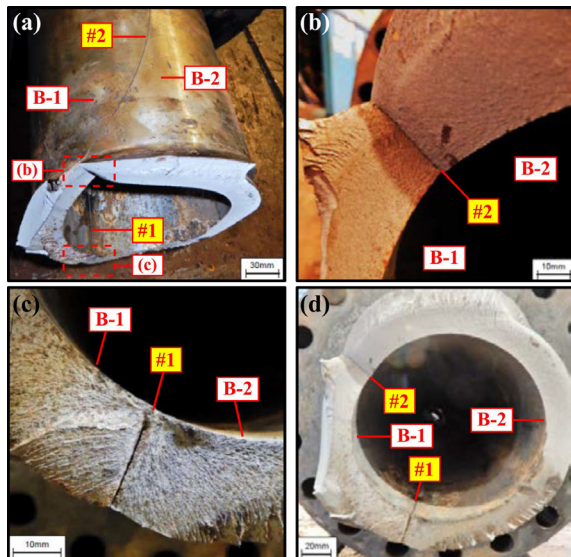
Part B (a) zoomed out view, (b) zoomed in view of the crack intersection, (c) zoom in view of the initial crack, and (d) complete crack propagation.
